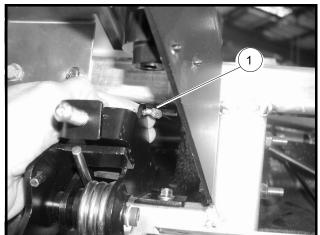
12 Z-Shaped Cable End (Gasoline Vehicles)
